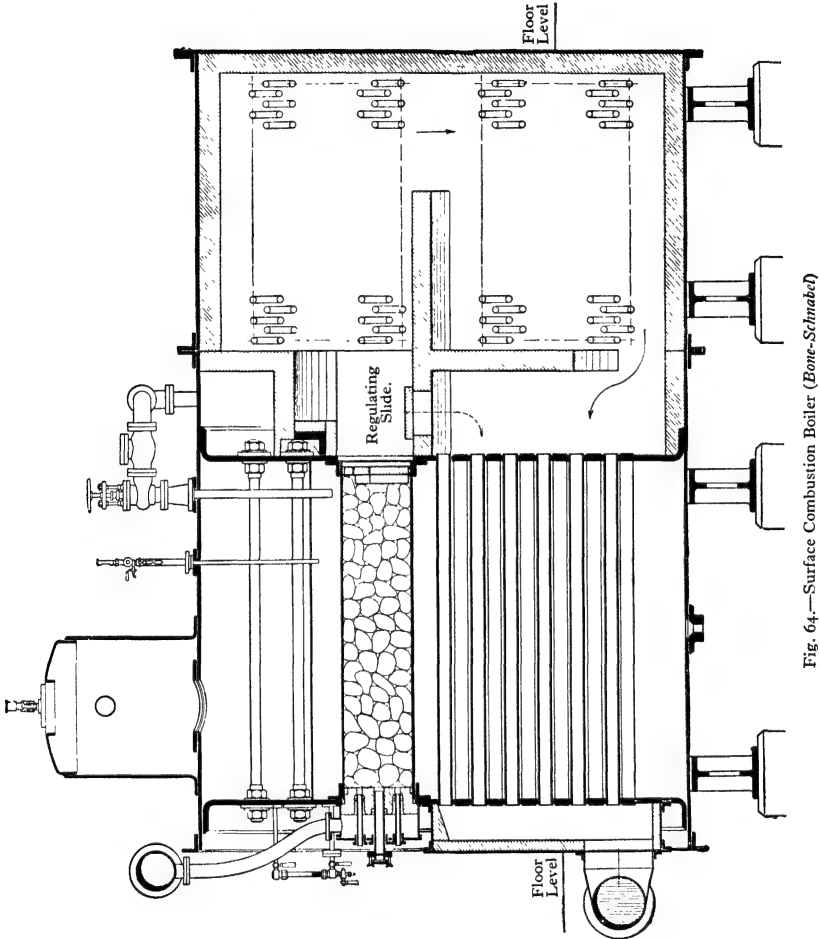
Surface Combustion Boiler (*Bone-Schnabel*)
